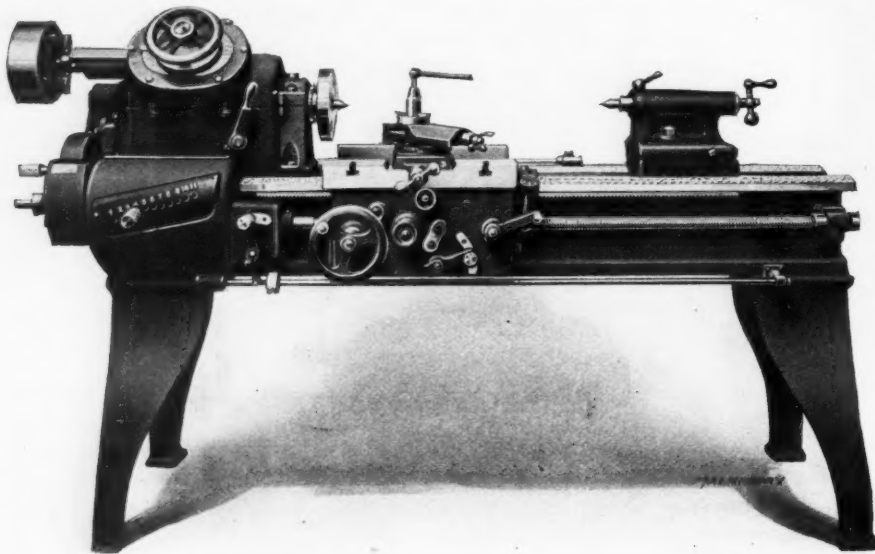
Carroll-Jamieson 14-inch Tool-room and Manufacturing Lathe
